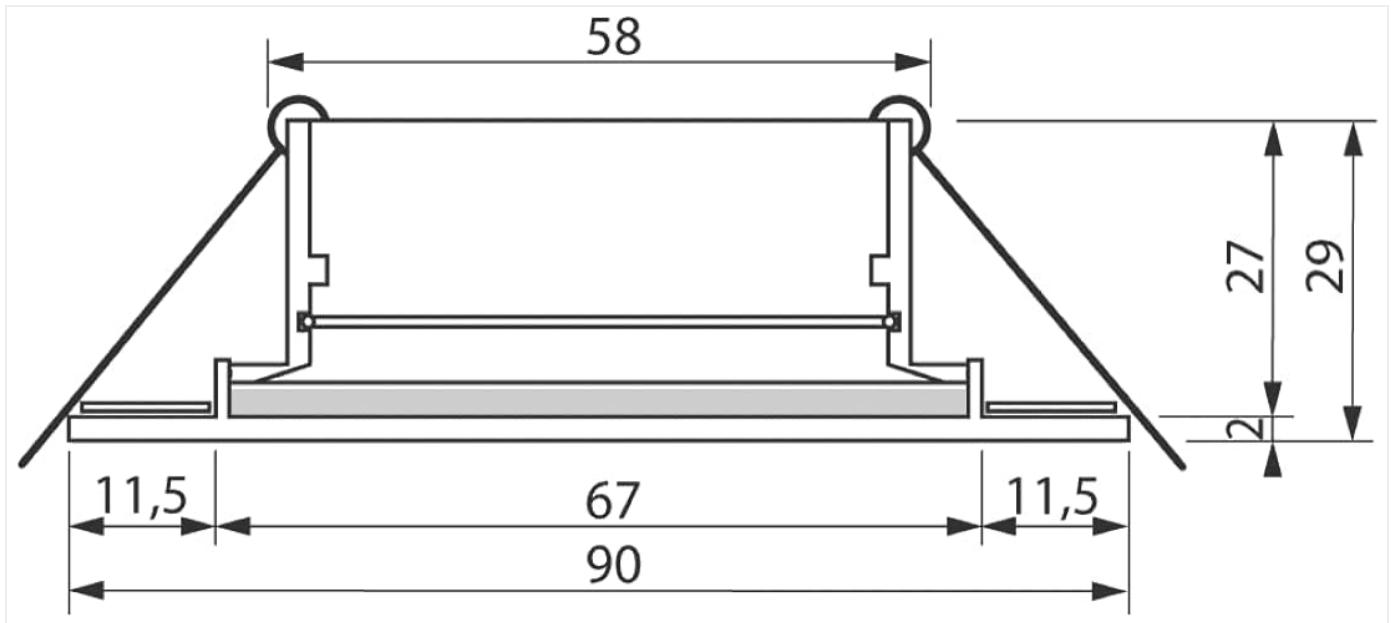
Dimensional drawing of the recessed spotlight (dimensions in mm).
